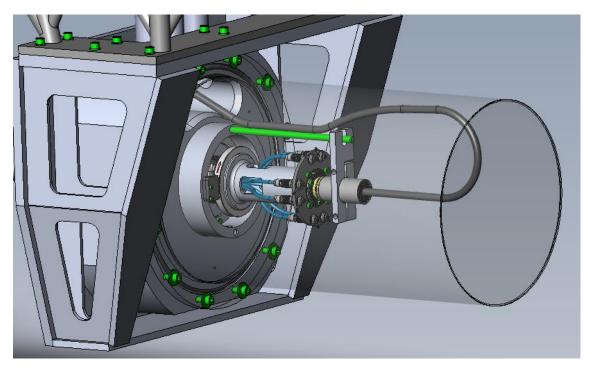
Detail CAD view of the slip ring and encoder inside a dry sleeve
